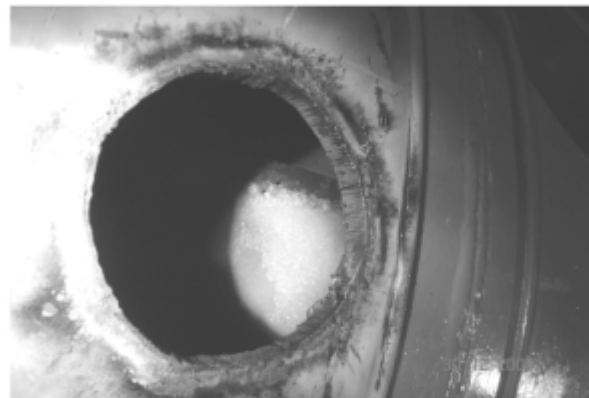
Holes cut on the either side of the LP Heater shell to see the welding between Drain cooling Zone shroud / Partition Plate / Sealing Ring
